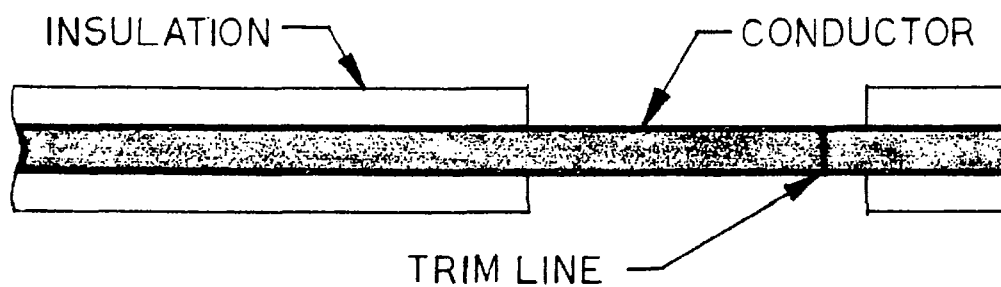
Unshielded cable stripped with plane stripper.
